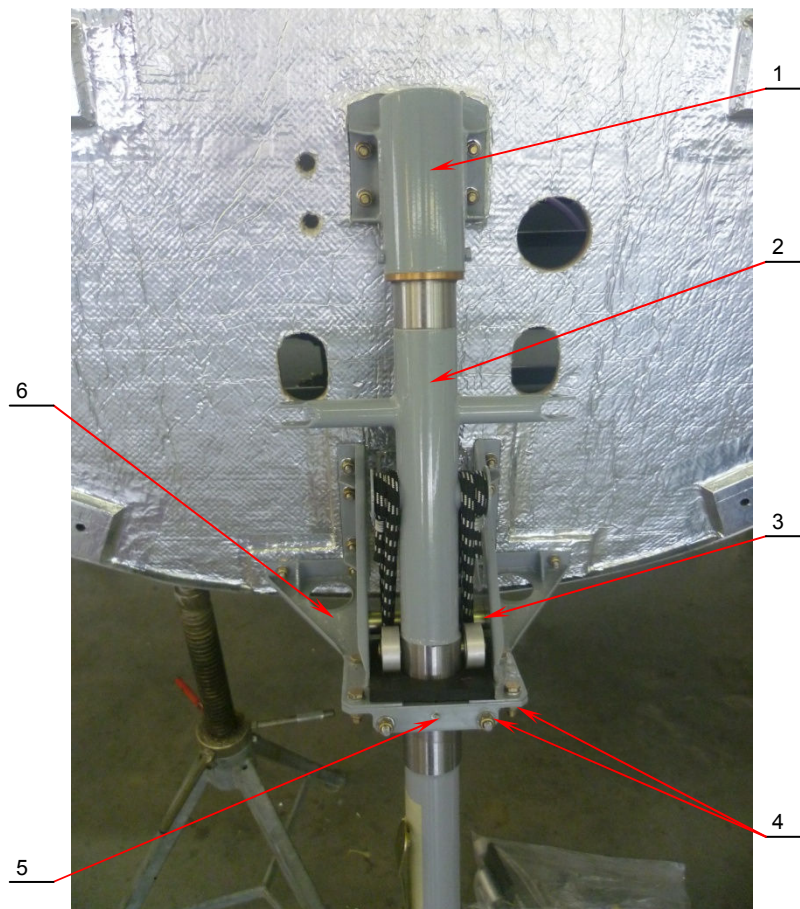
Nose wheel leg of the fixed undercarriage mounting
